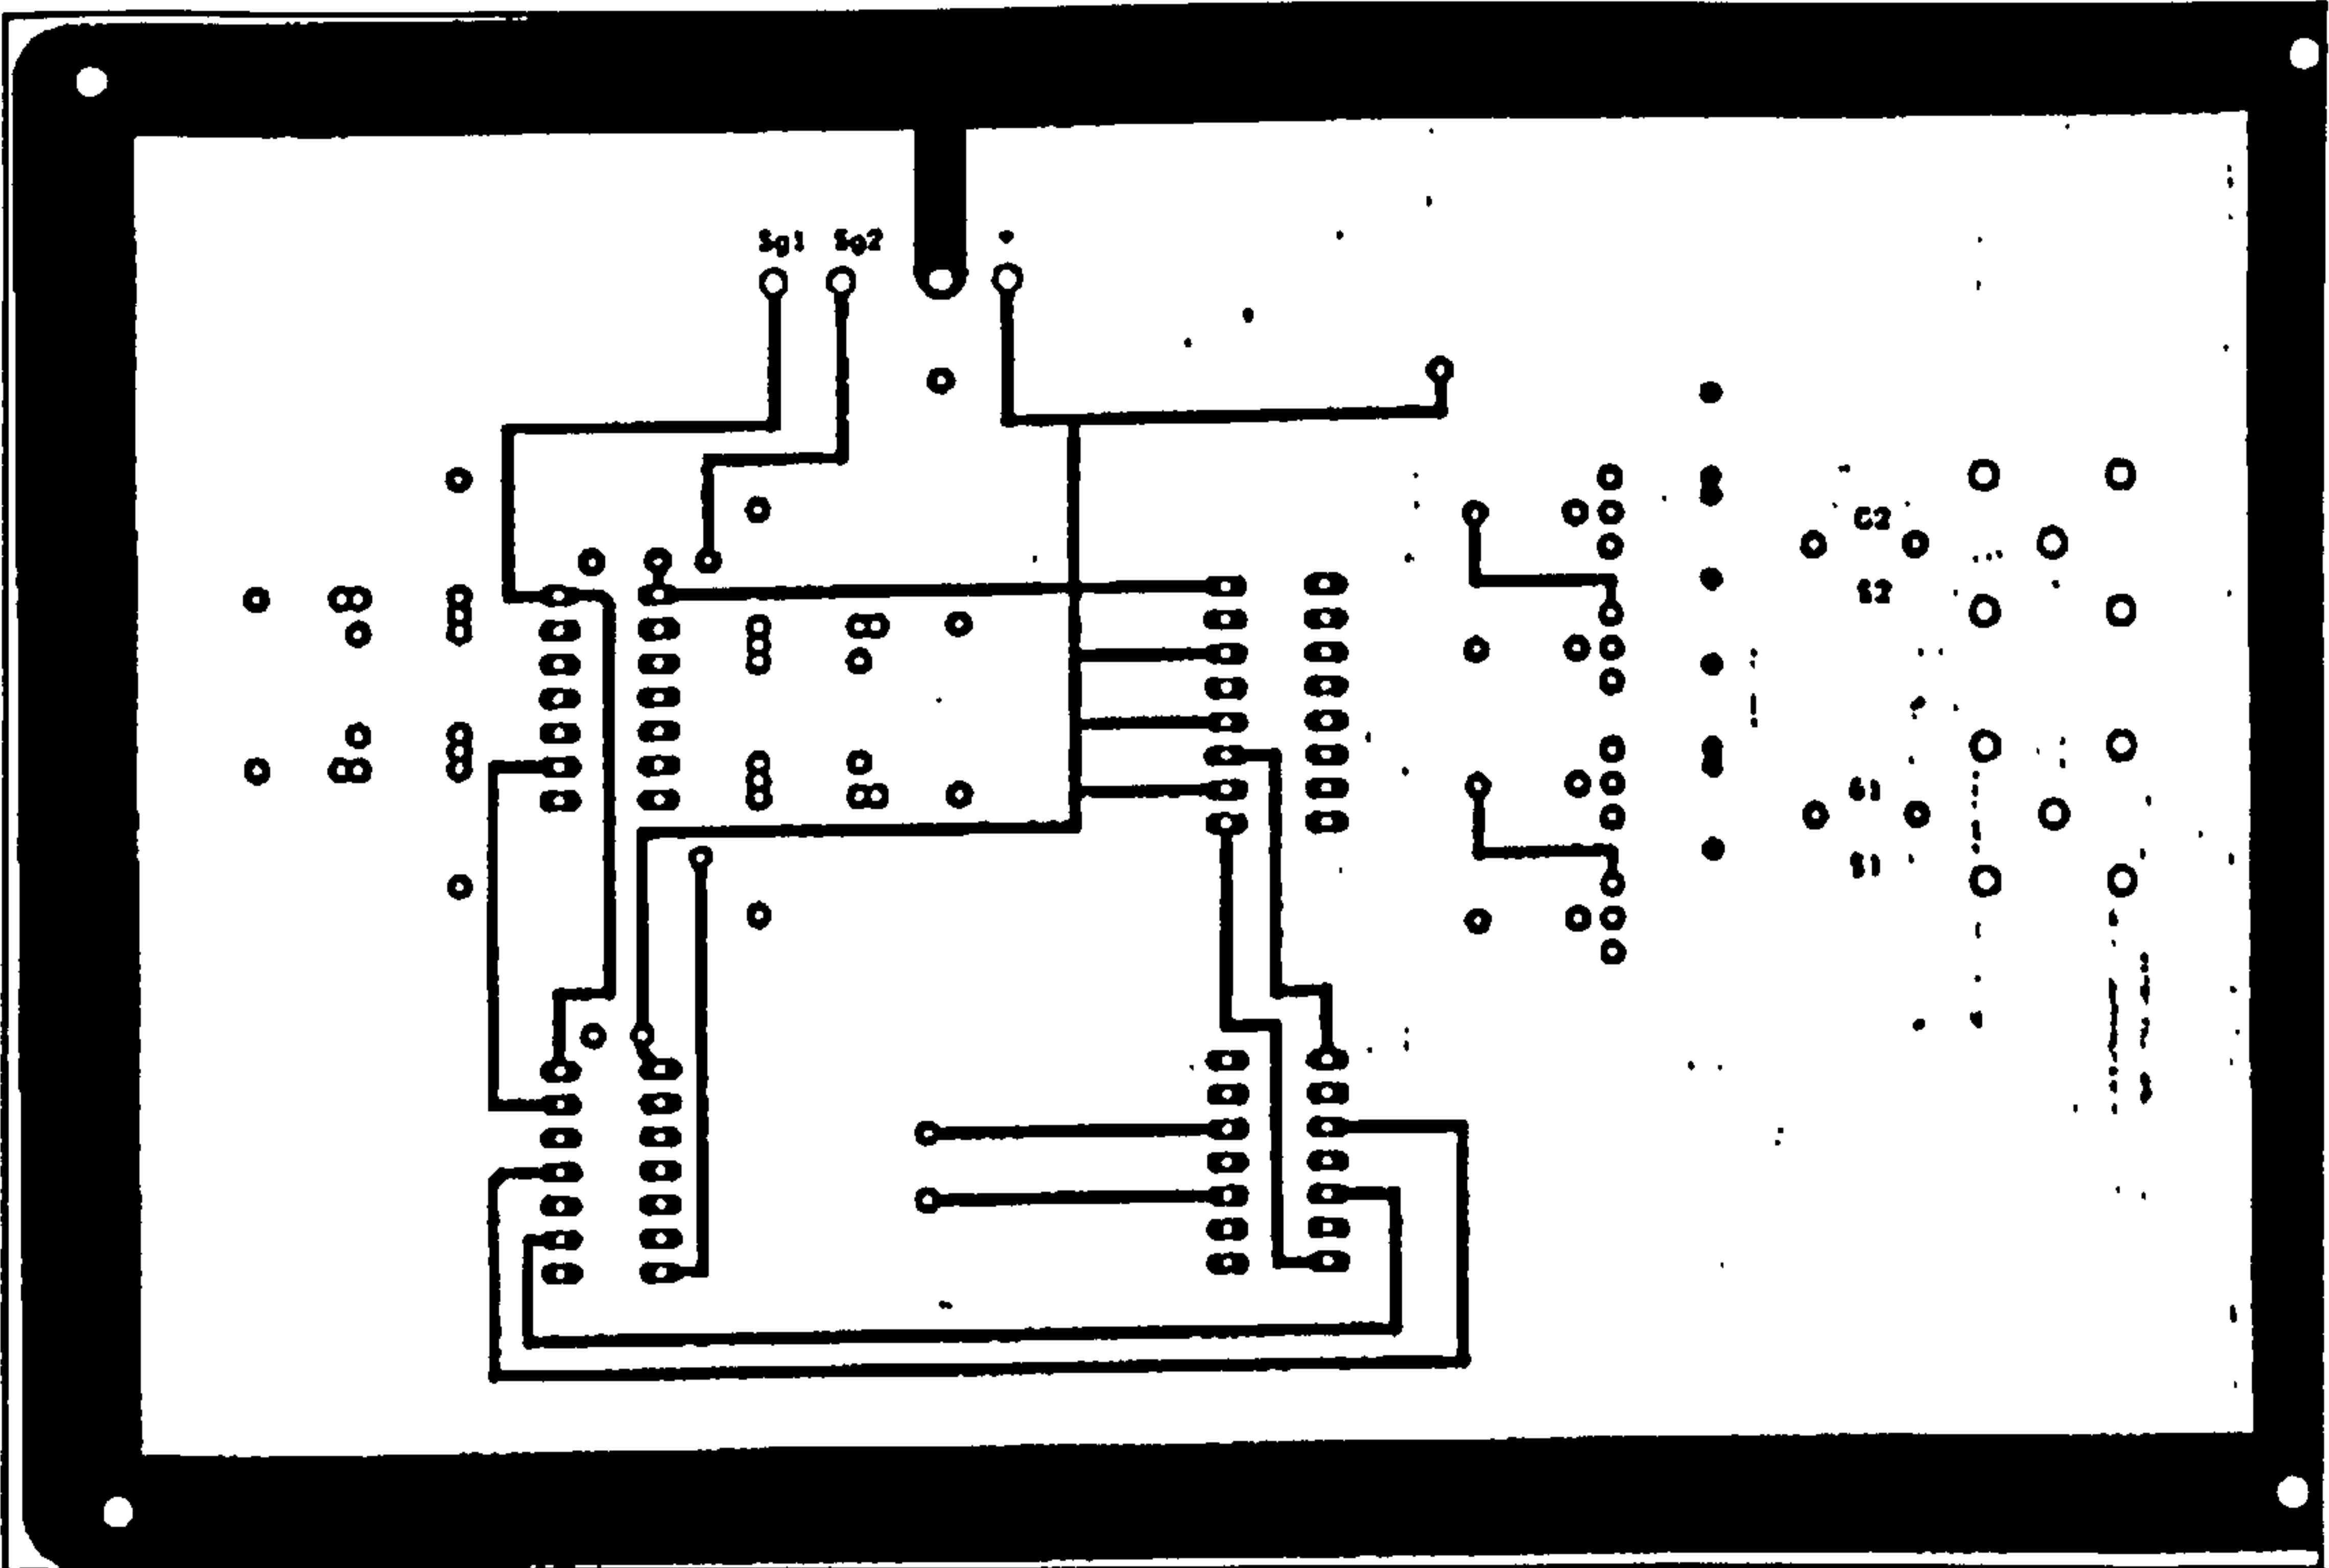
Bottom layer of the PCB diagram of the gate drive circuit.
